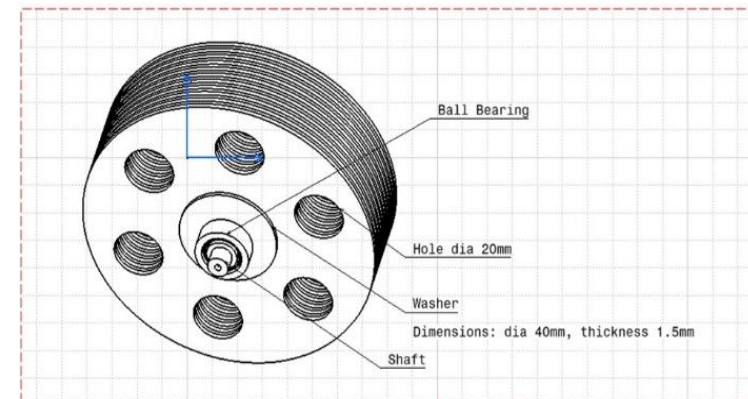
CATIA 2-D draft assembly of disc, washers, shaft and ball bearing
